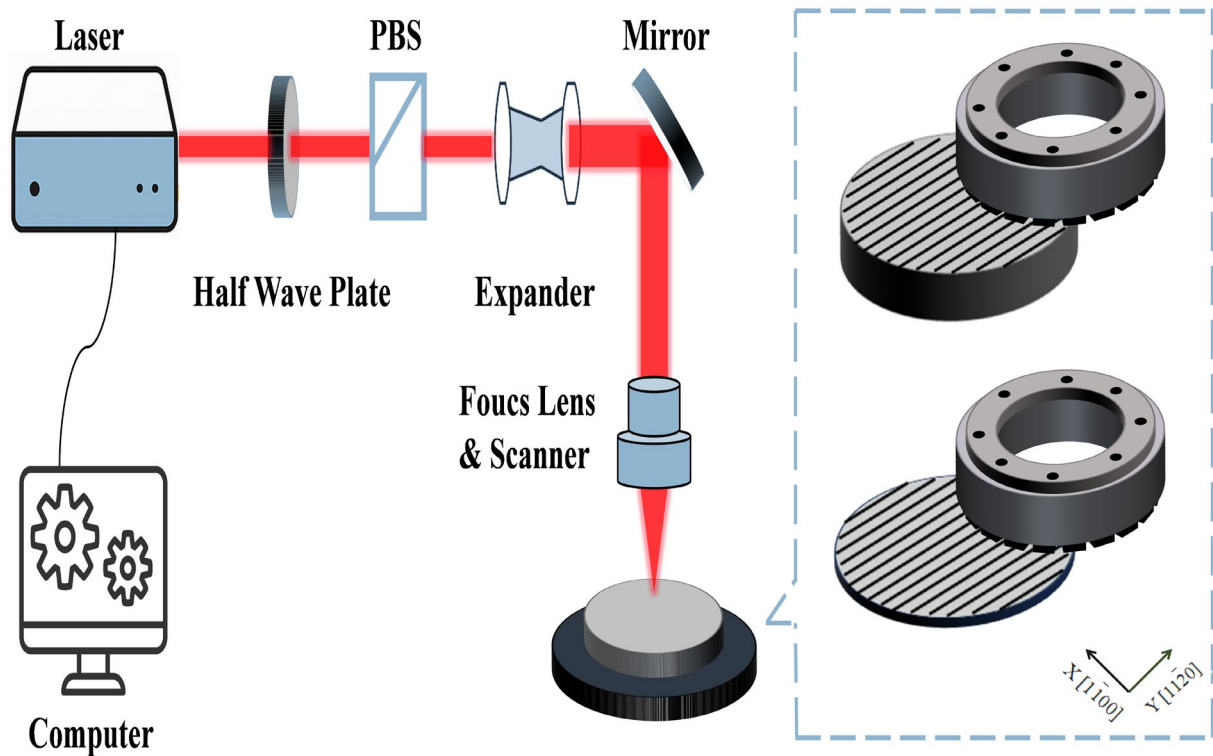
Schematic of laser slicing and subsequent grinding applied to 4H-SiC wafers.
